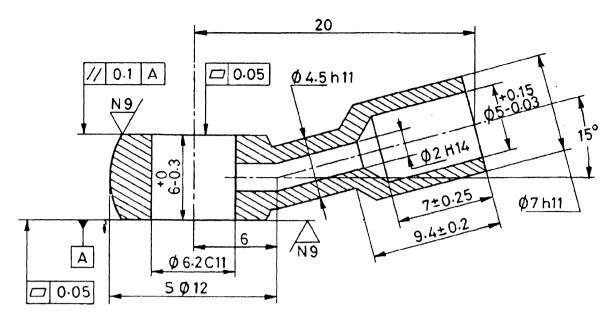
Dimensions and Tolerances of Bent Type Single Ended Pipe Union
